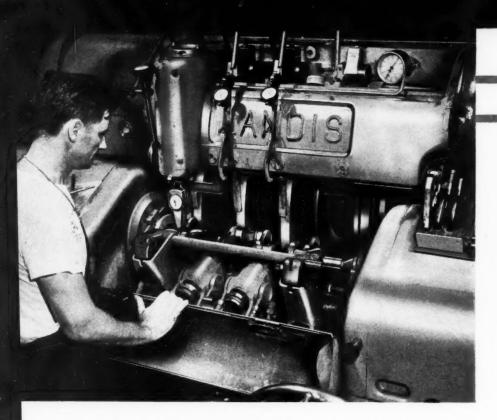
When the Crankshaft has been Swung into the Grinding Position, it is Located Endwise by Means of Dial Indicator Gage Shown at Left Center
